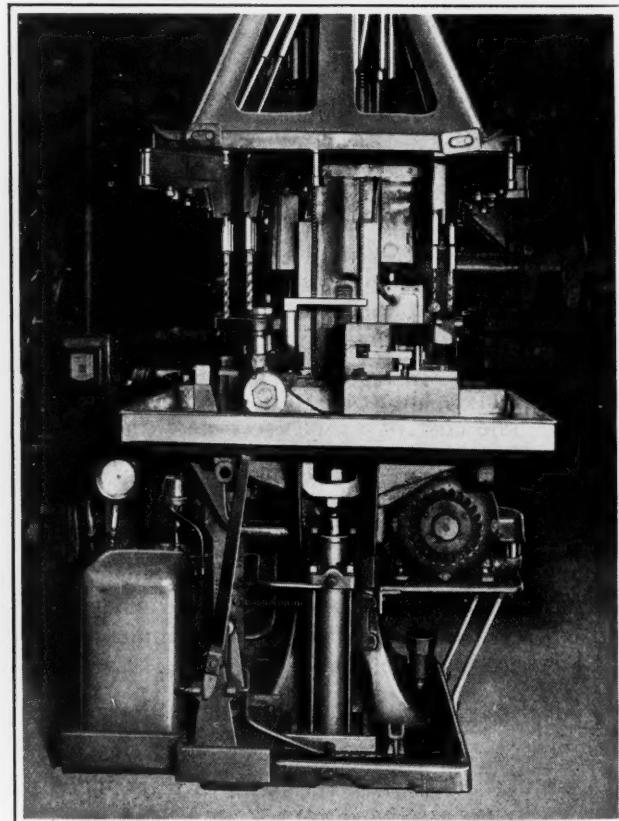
Hydraulic Equipment for Actuating the Table Replaced the Original Feeding Mechanism of This Machine
